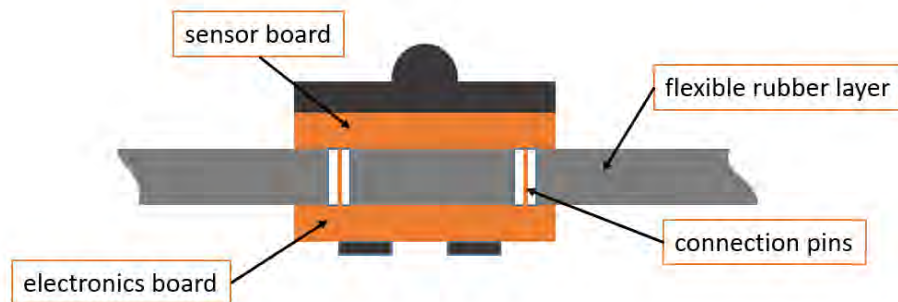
The sensor solution with two boards fixed on a rubber layer
